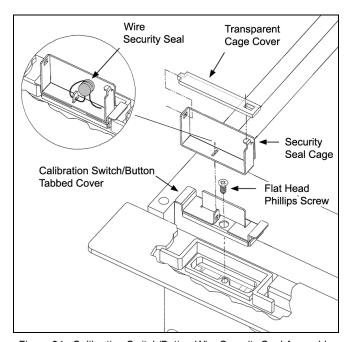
Calibration Switch/Button Wire Security Seal Assembly.
